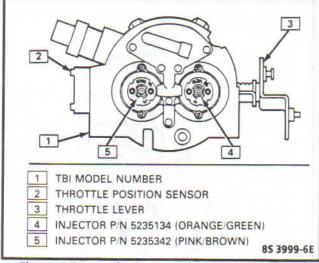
Fuel Injector Color Code Locations TBI 220 (4.3L Engine C/K Series)
